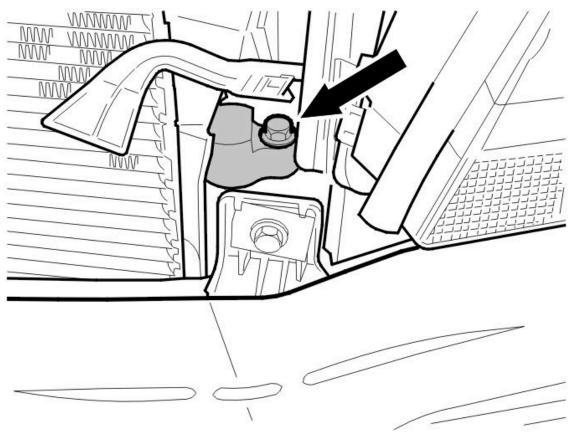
Locating Air Conditioning Condenser Pipe Courtesy of VOLVO CARS CORPORATION
